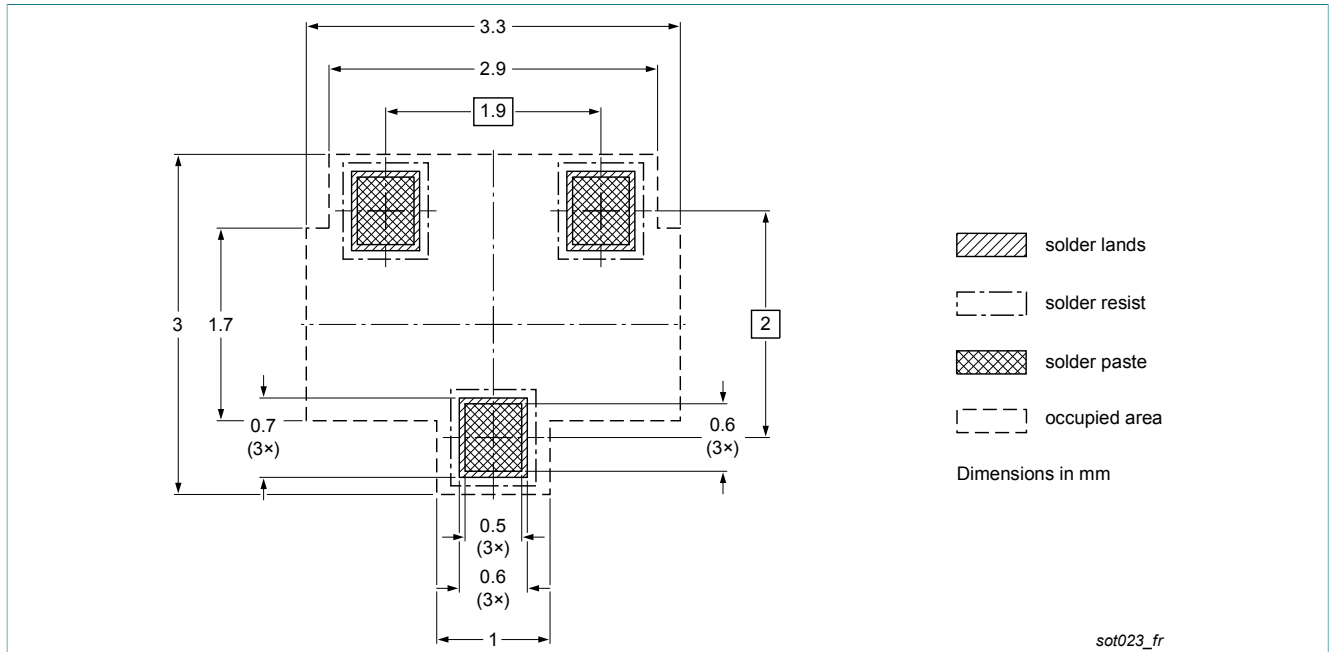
Reflow soldering footprint for TO-236AB (SOT23)
